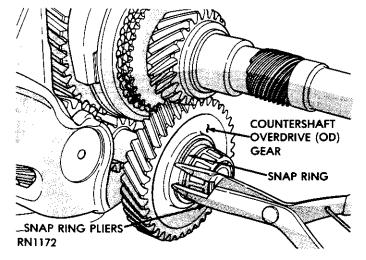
Removing/Installing Countershaft OD Gear Snap Ring
